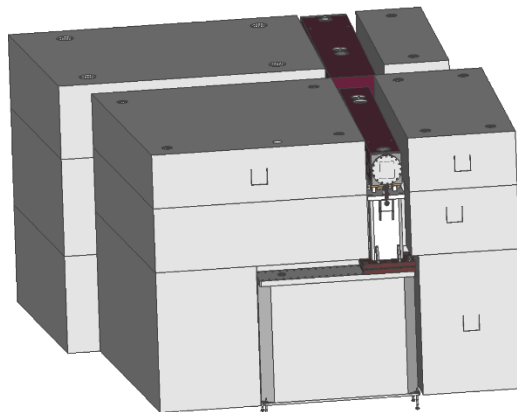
MIRACLES Bunker Wall Insert design integrated into the ESS bunker wall.
